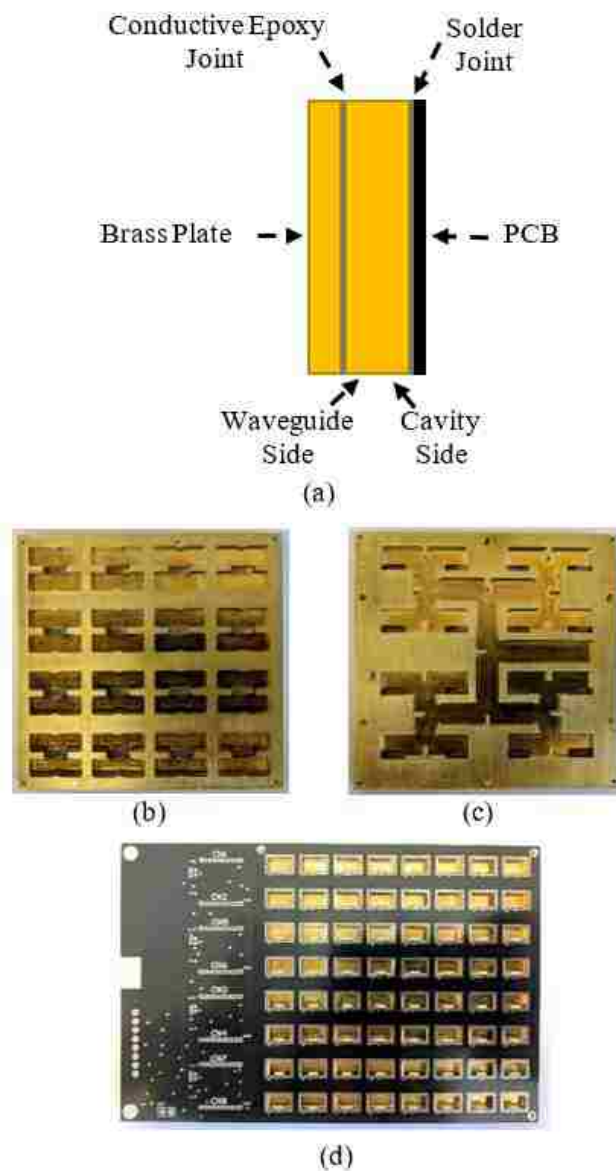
Antenna array fabrication: (a) assembly diagram, (b) cavity side of brass block, (c) waveguide side of brass plate, and (d) assembled array.
